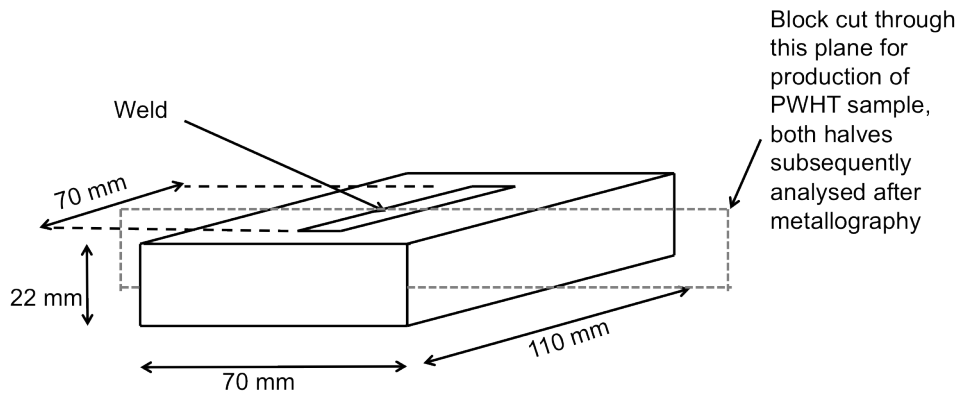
Illustration of material dimensions, location and size of weld relative to plate, and plane through which material is cut for production of as-welded and PWHT samples.
